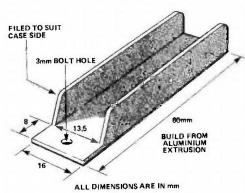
Details for the aluminium extrusion that houses the photoprobe.
